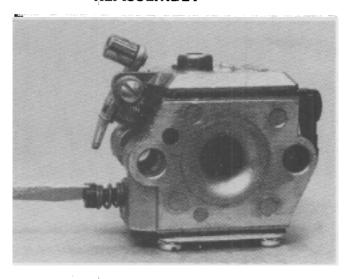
Assemble needle valve in carburetor. Seat it very lightly and back it out one and a half (1 1/2) turns.
